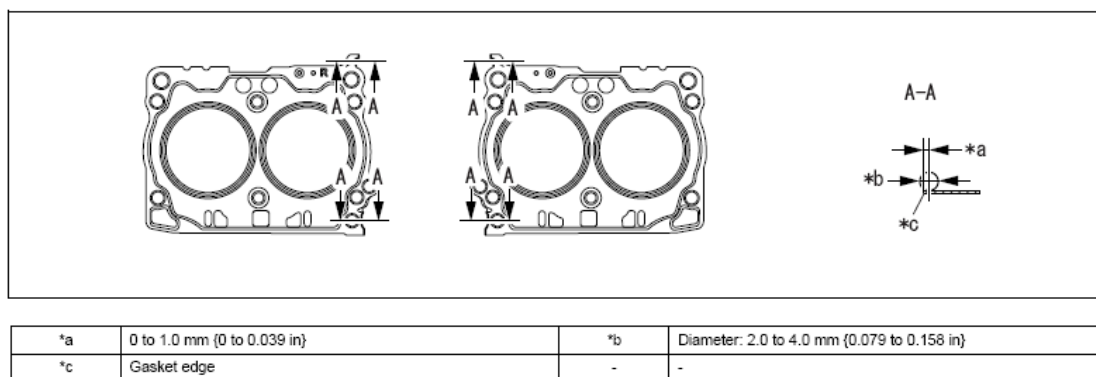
Identifying Three Bond 1217G Applying Area On Cylinder Head Gasket
